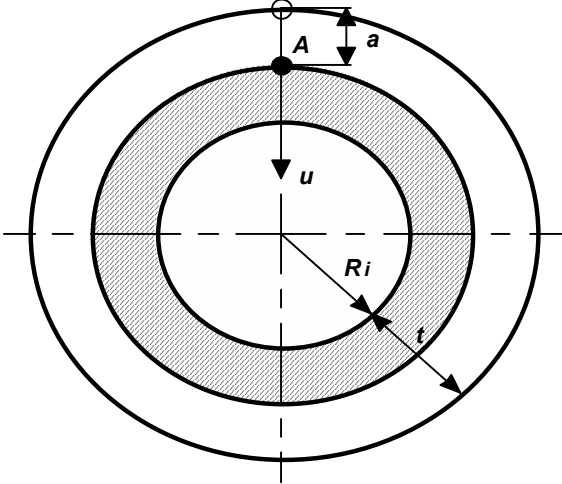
Complete circumferential external surface crack in a cylinder.
